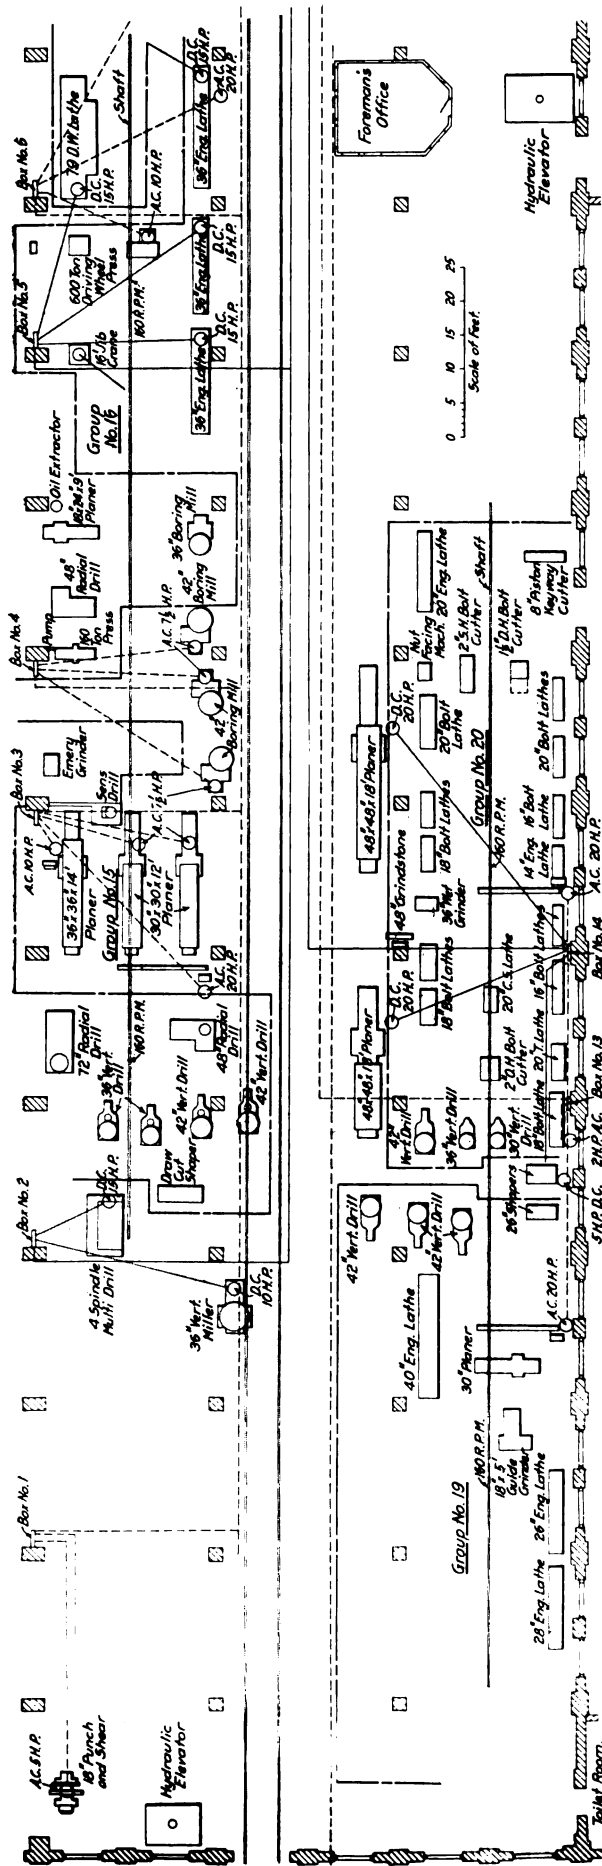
South End of Machine Shop Showing Arrangement of Machine Tools, Motors and Wiring.
